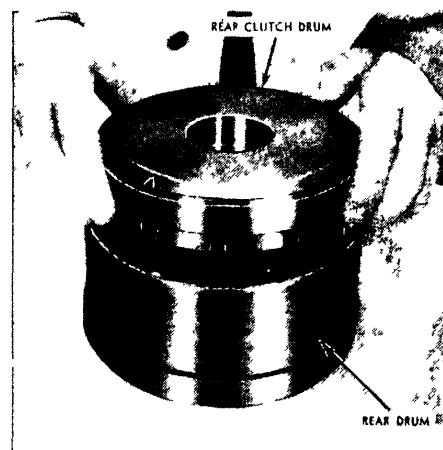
Install rear clutch drum and piston over drive pins into drum.
